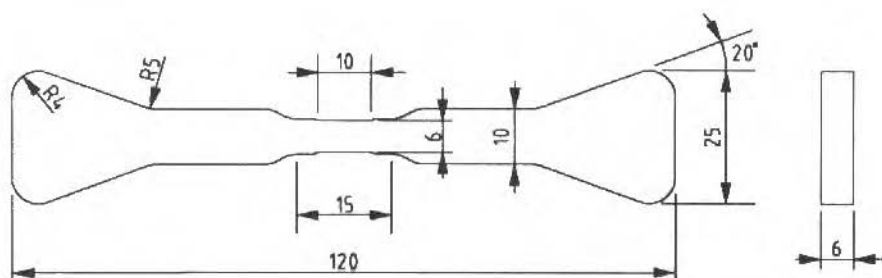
Geometry of Tensile Specimens (dimensions in mm)
